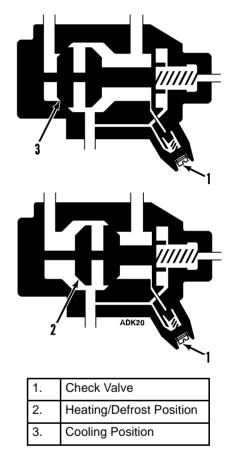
Three-way Valve Condenser Pressure Bypass Check Valve
